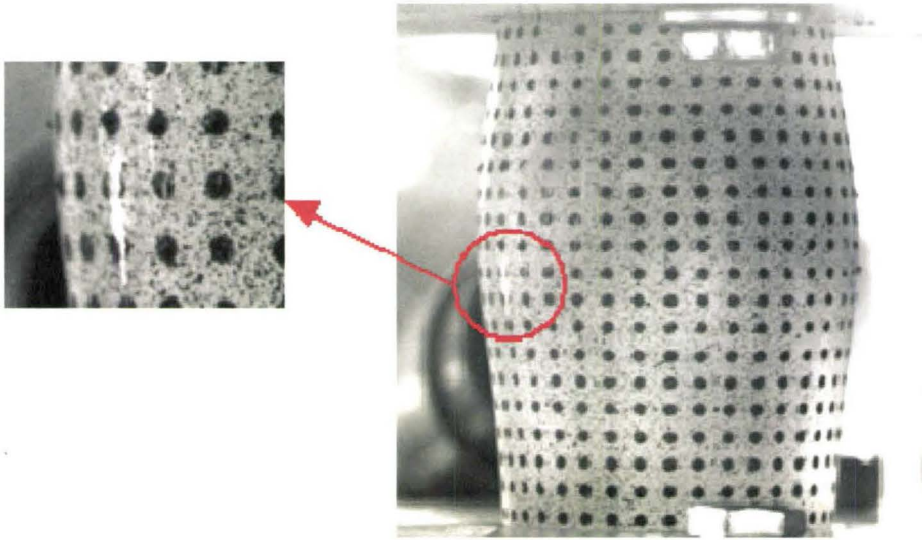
Crack on the surface of a bulged tube specimen imprinted with a periodic grid pattern prior to bursting (no axial-feed).
